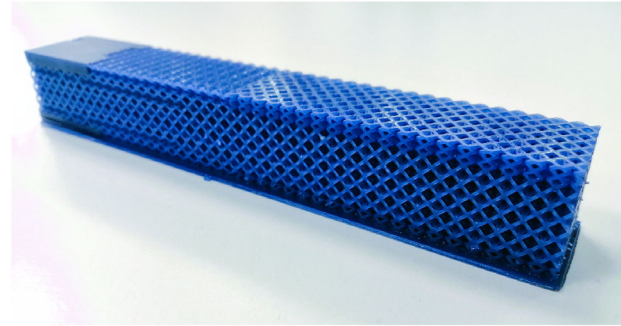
3D-printed demonstrator of the multicell lattice assembly.
